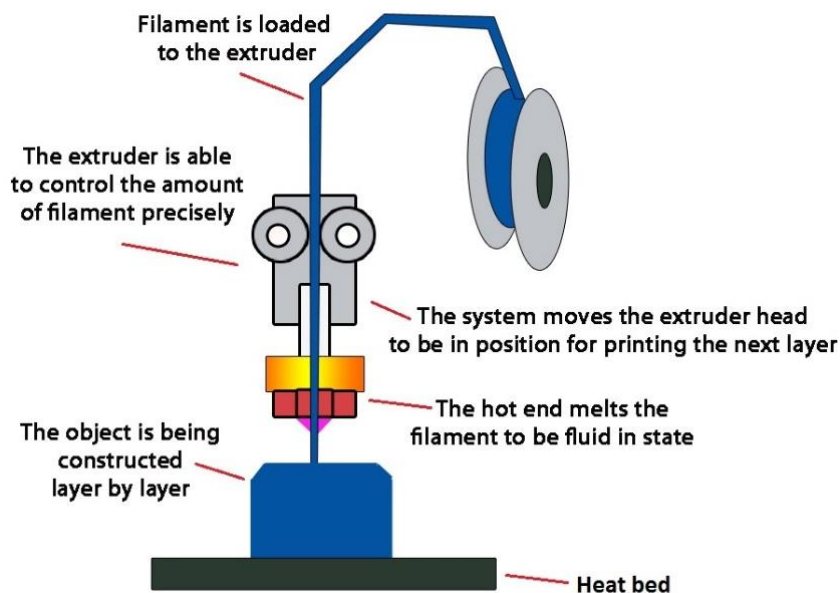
Working mechanisms of a 3D printer (Ozeki n.d.).
